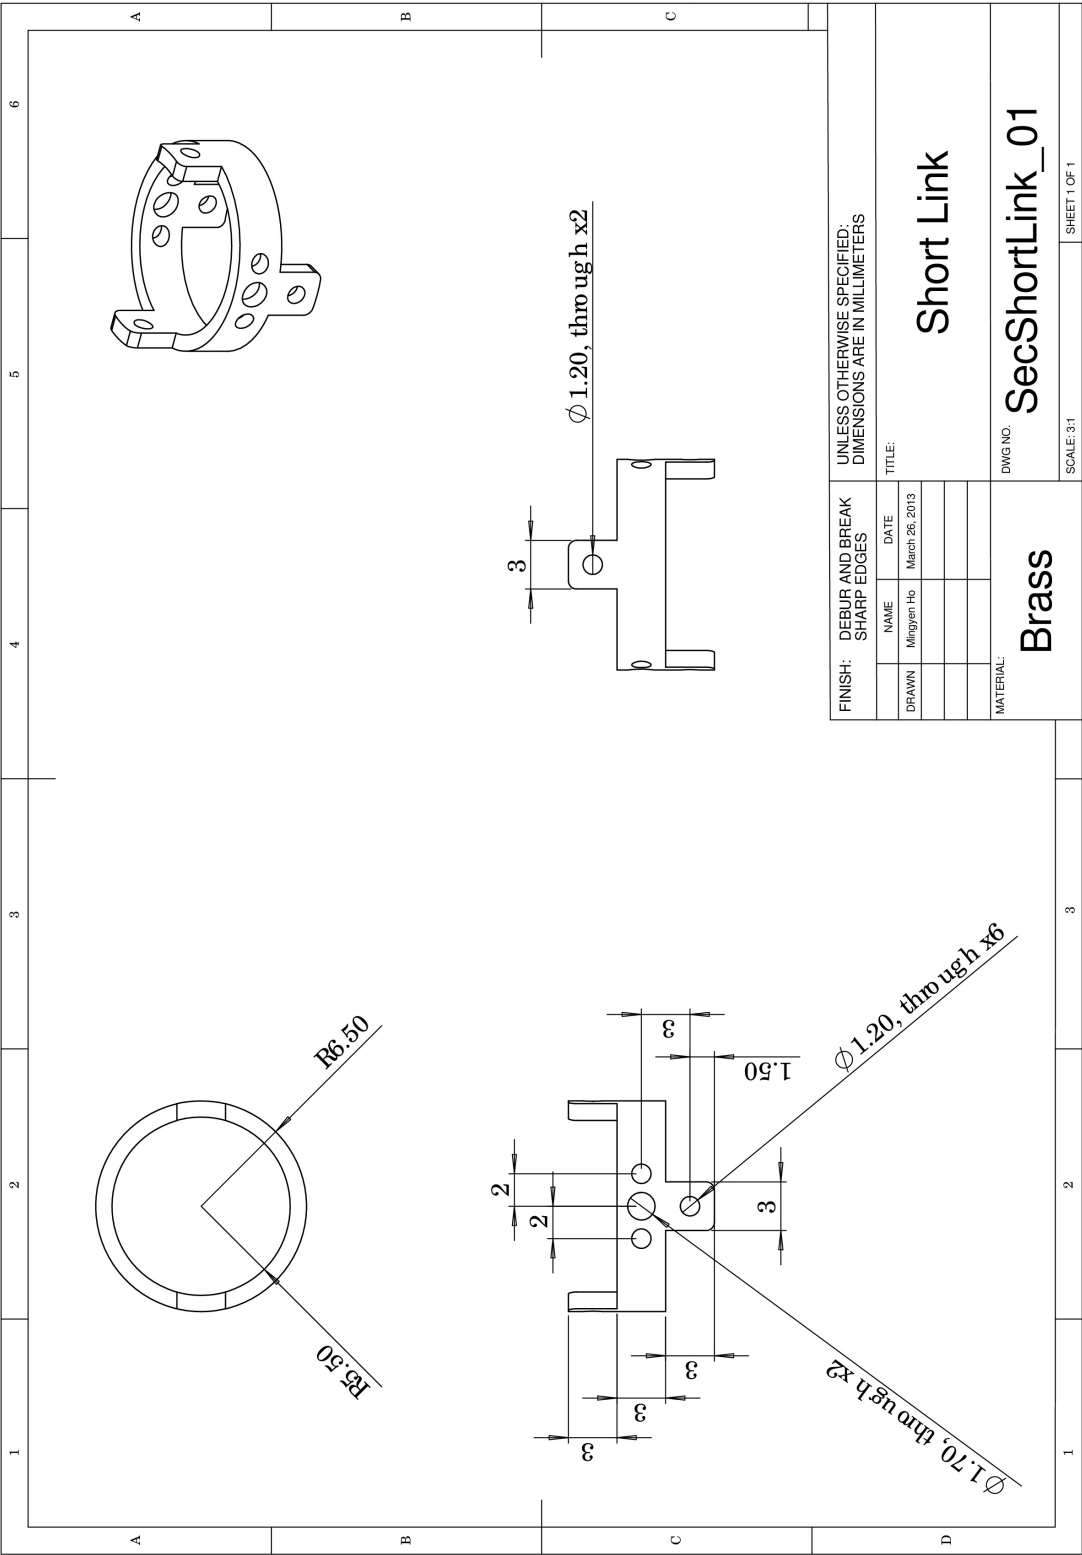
Engineering drawing of the short link of the SMA wire actuated MINIR.
